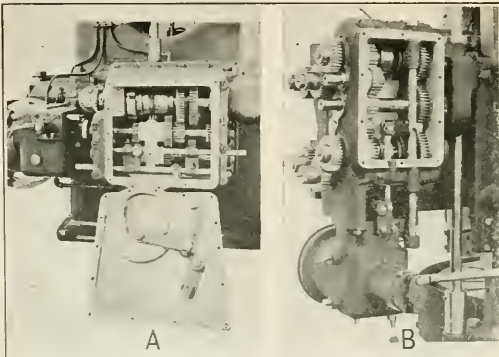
Feed Change Gear Box and Feed Clutch Gear Box
